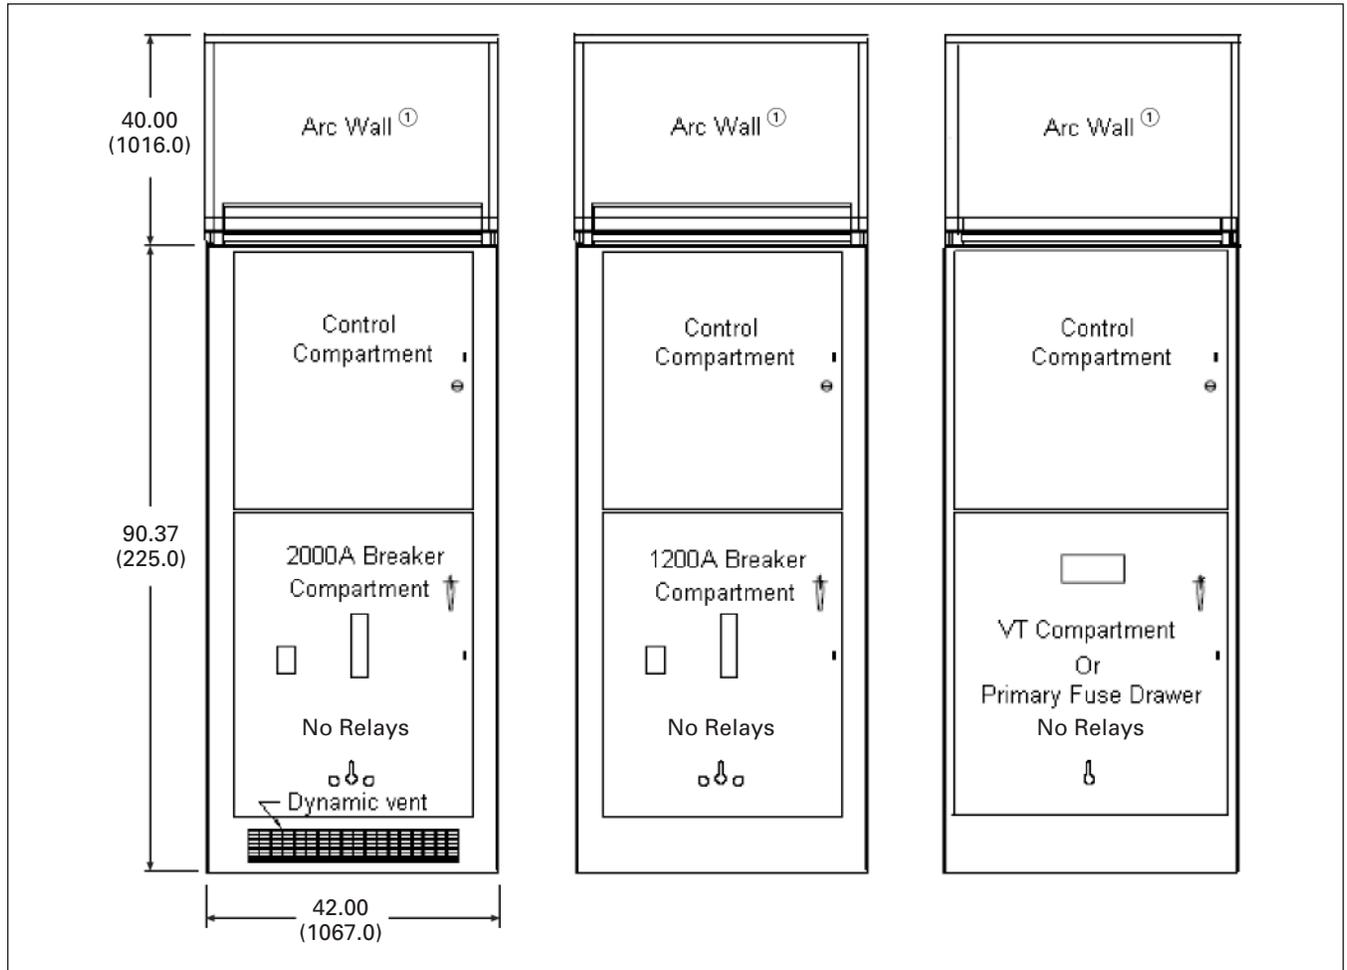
Typical Arc-Resistant Switchgear Application Layouts—27 kV
